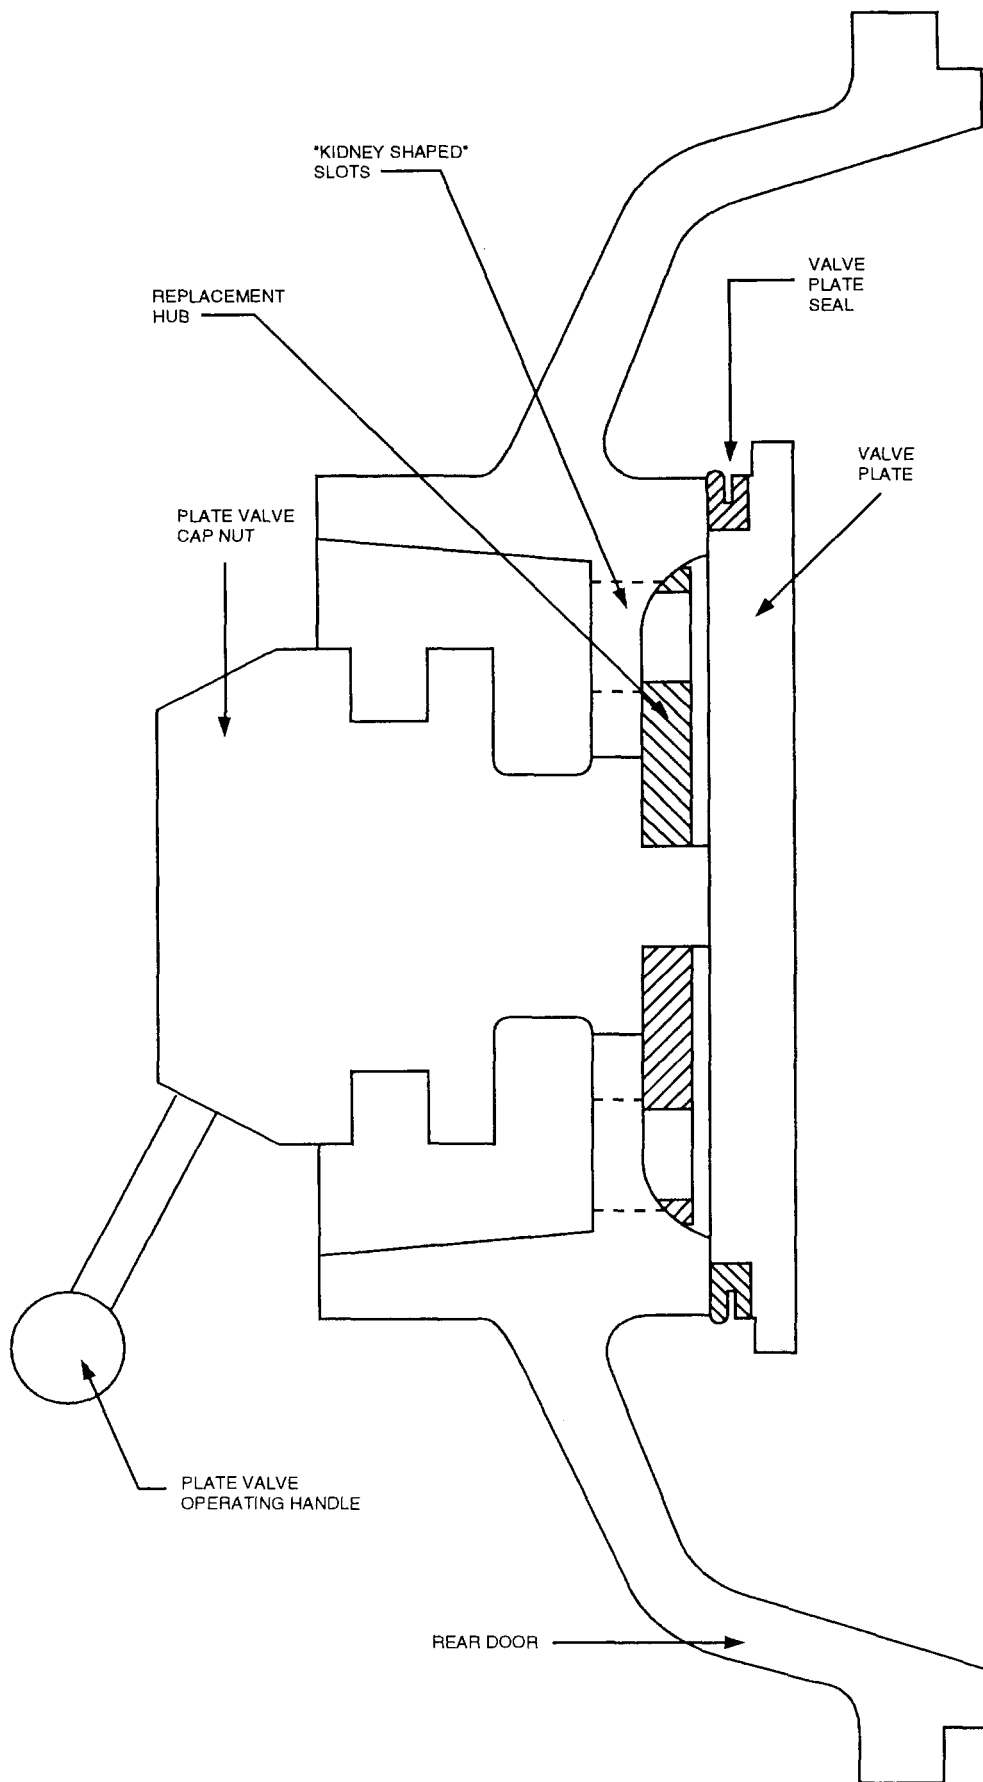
REAR DOOR PLATE VALVE POSITION OF REPLACEMENT HUB
